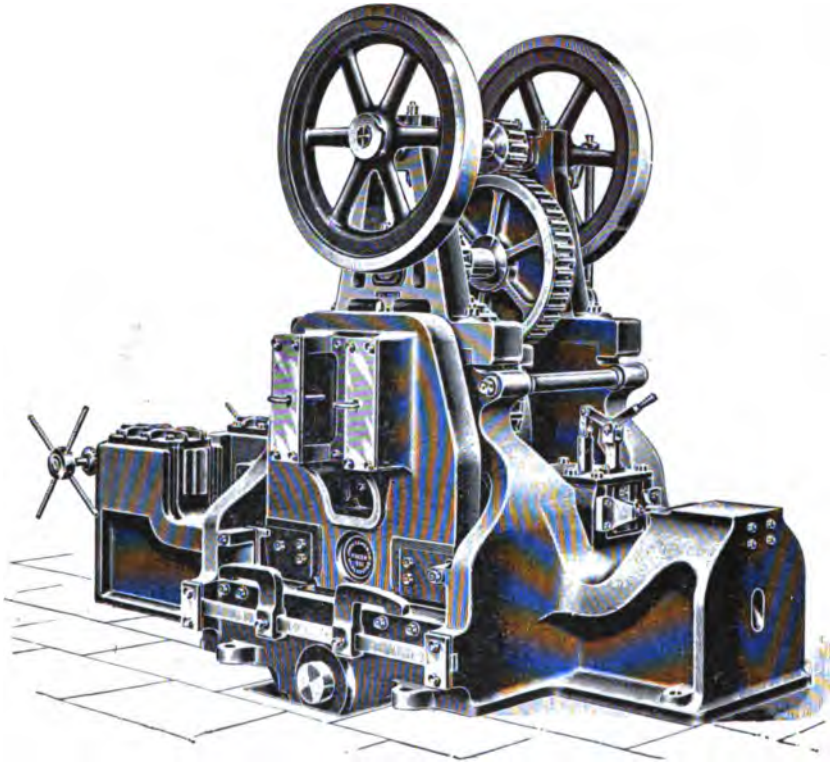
Combined punching, bending, and angle-shearing machine.
